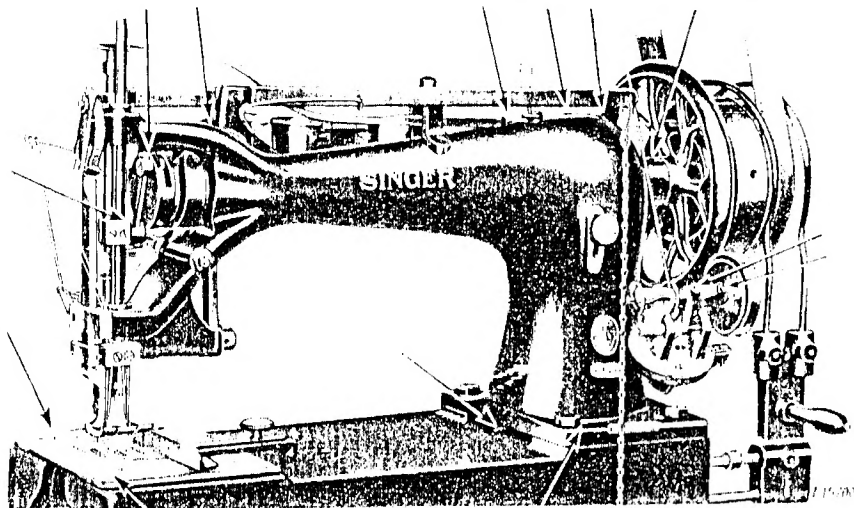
Oiling Points at Front Side (All Class 7, Two-Needle Machines Except Machine 7-57)
